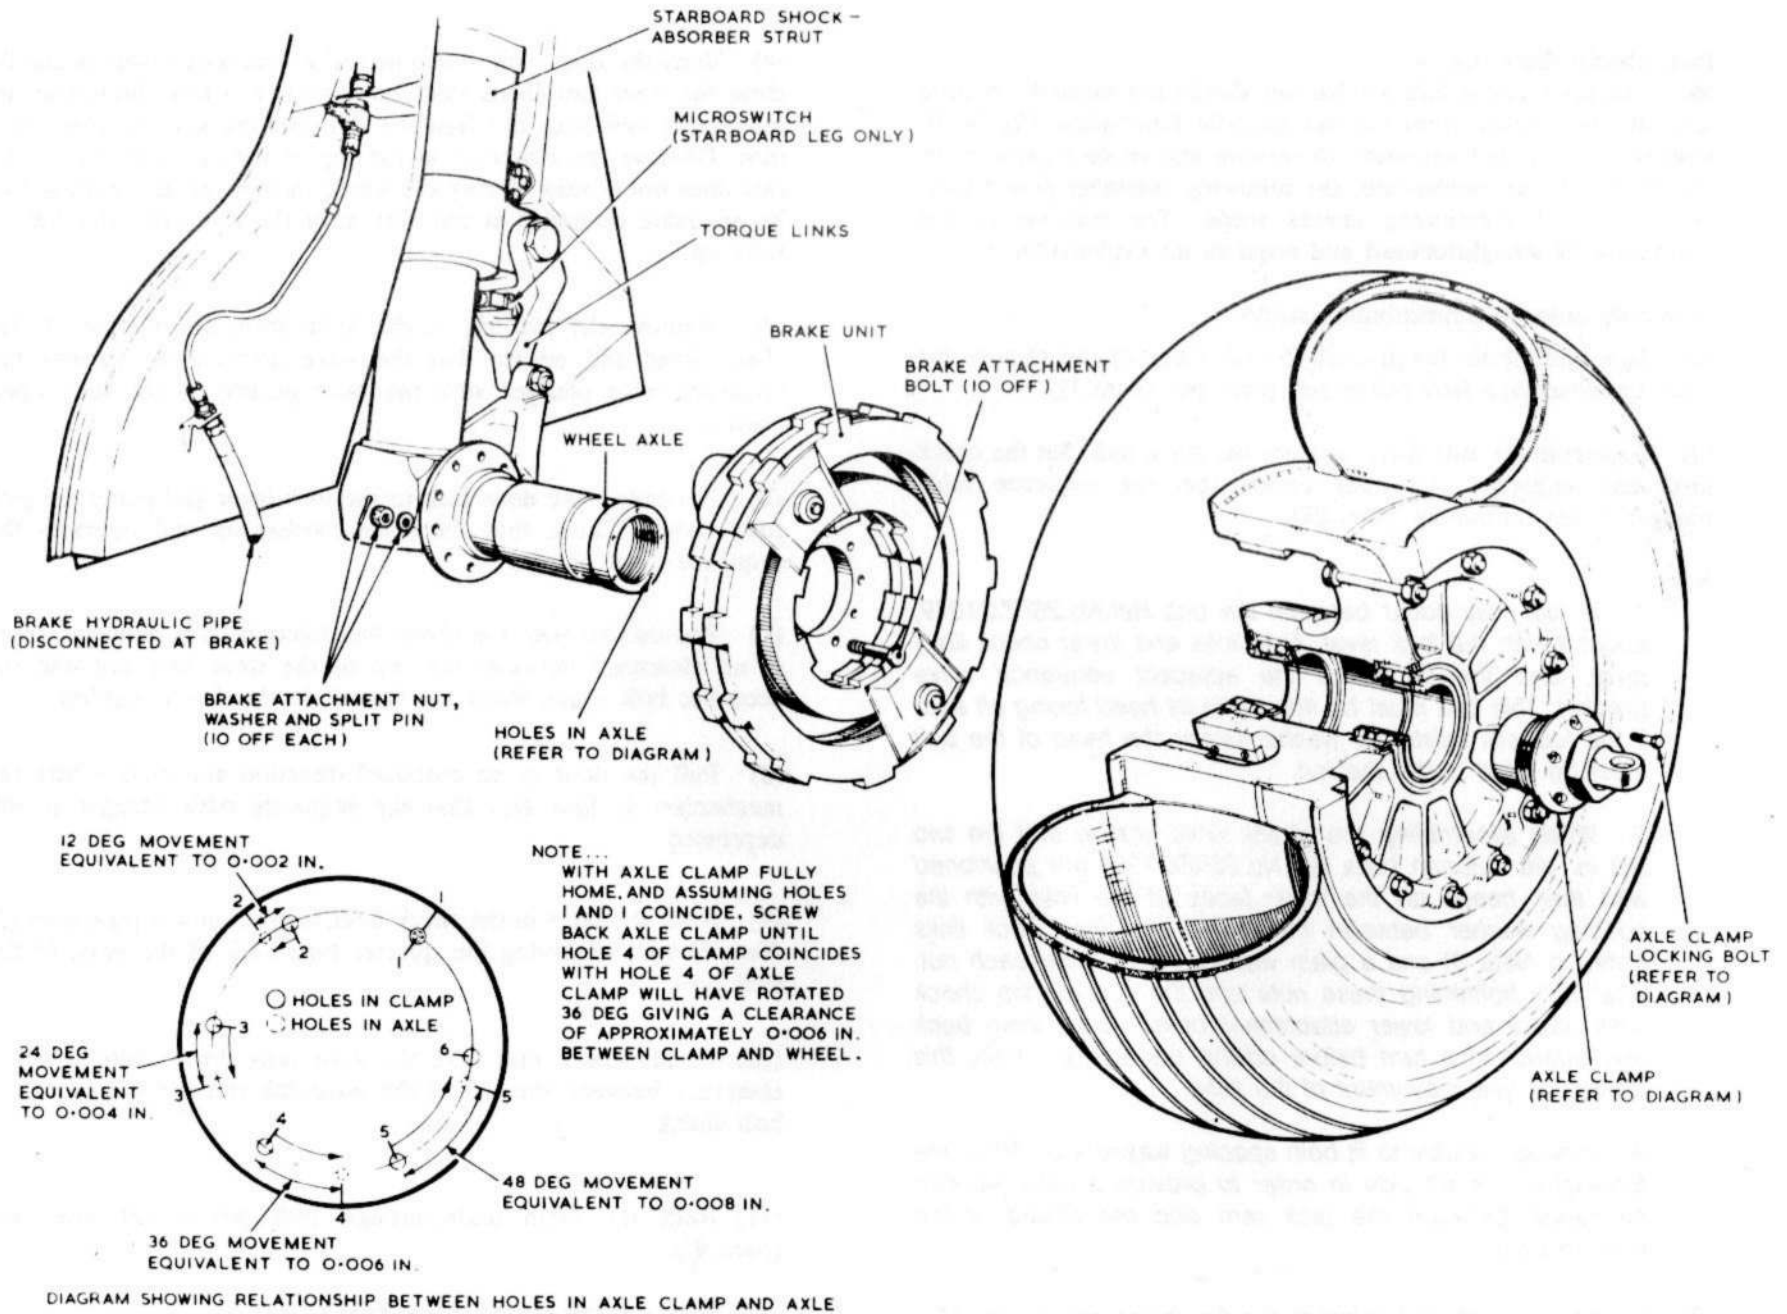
WHEEL AND BRAKE — REMOVAL AND ASSEMBLY
